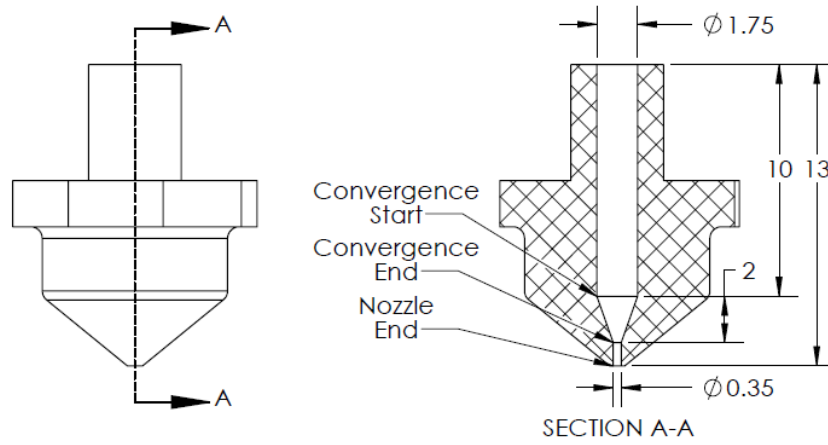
Common FDM Nozzle Geometry, Dimensions are Shown in Millimeters (mm)
